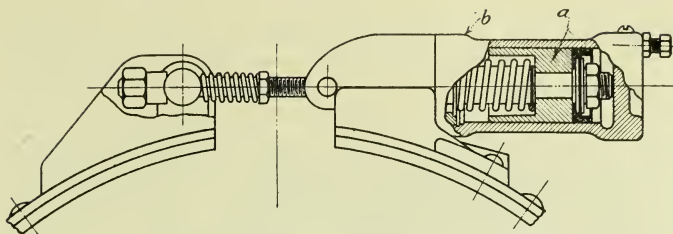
CONSTRUCTION OF THE BAND MECHANISM EMPLOYED ON A HYDRAULIC BRAKE
